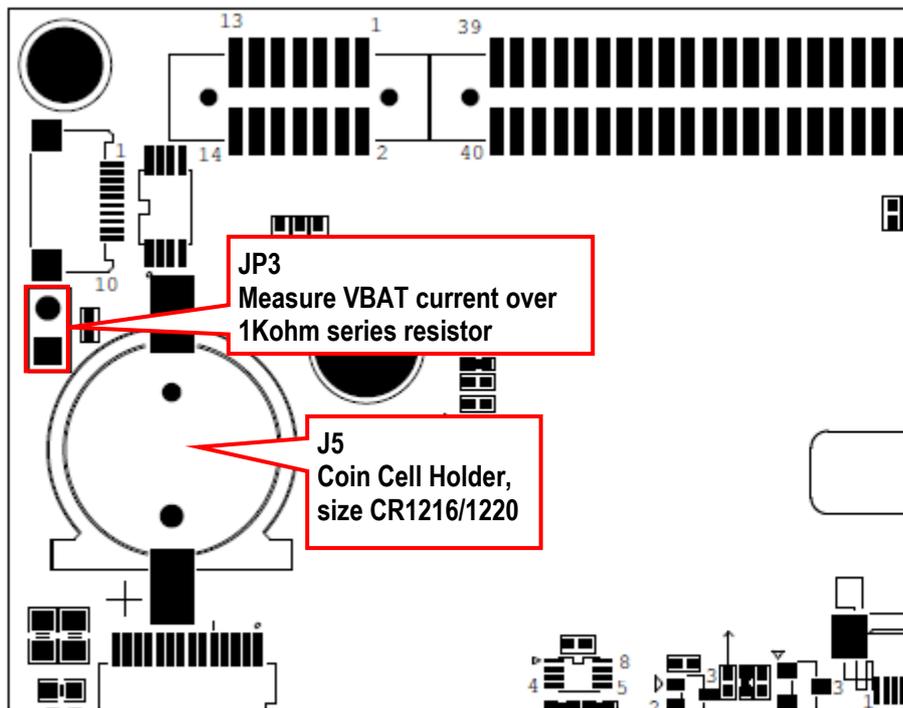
COM Carrier Board rev A, VBAT Coin Cell Holder Connector
